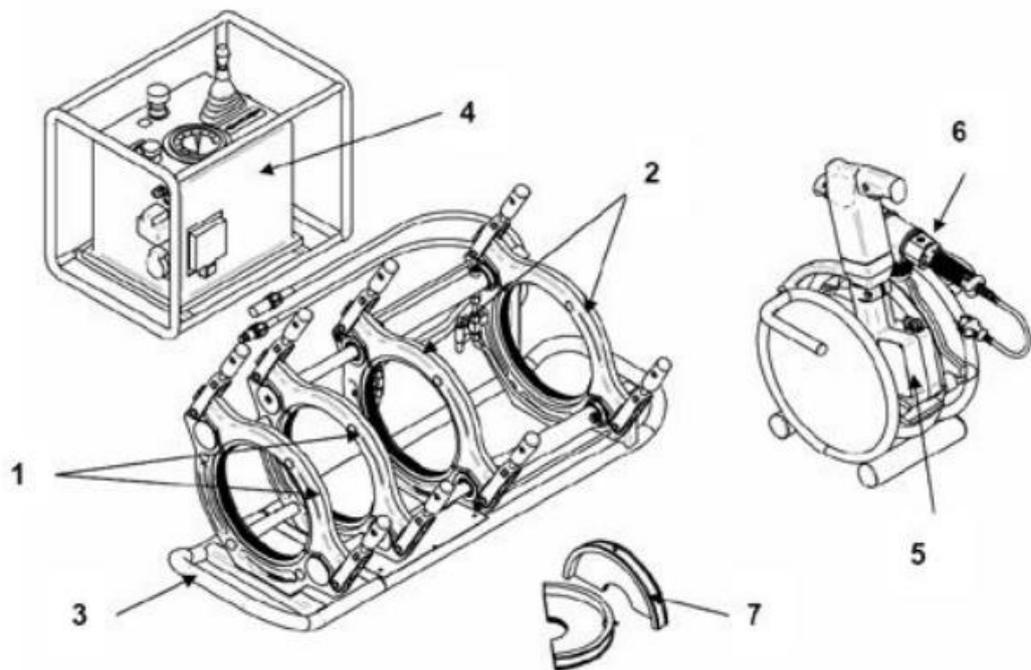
Composition of butt-welding equipment [9]:
